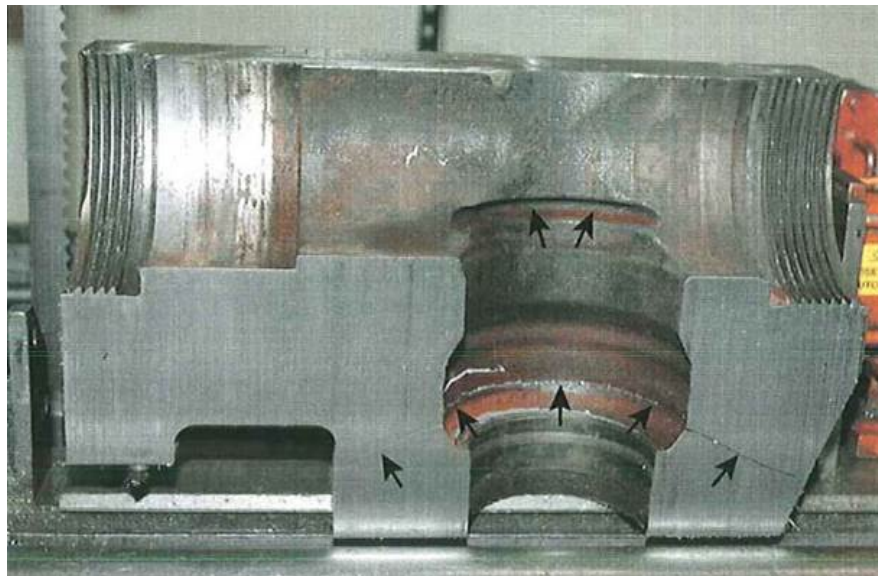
Example component geometry for weld cladding deposition - Photo courtesy of Weir SPM.
